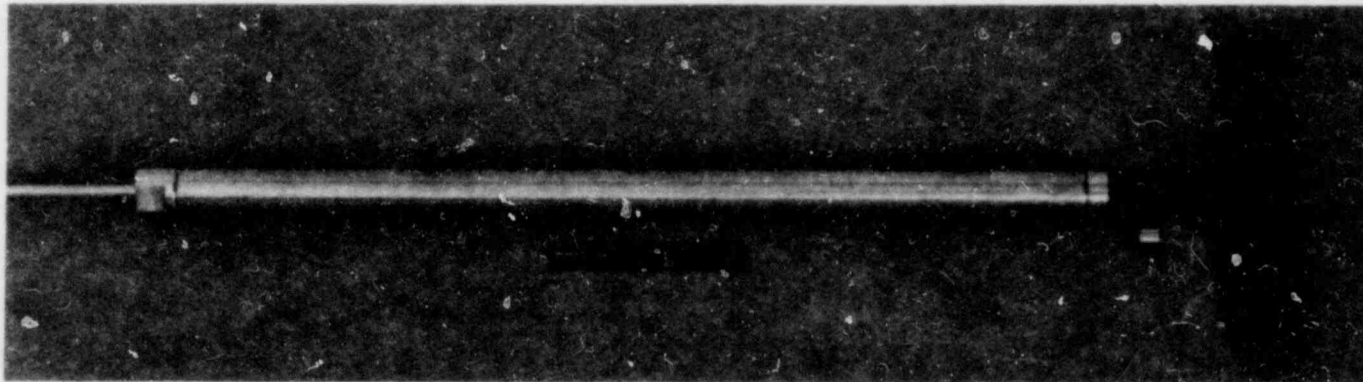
Assembled Components from Figure 1 Showing Application of Loading Prior to Seal Welding Specimen
